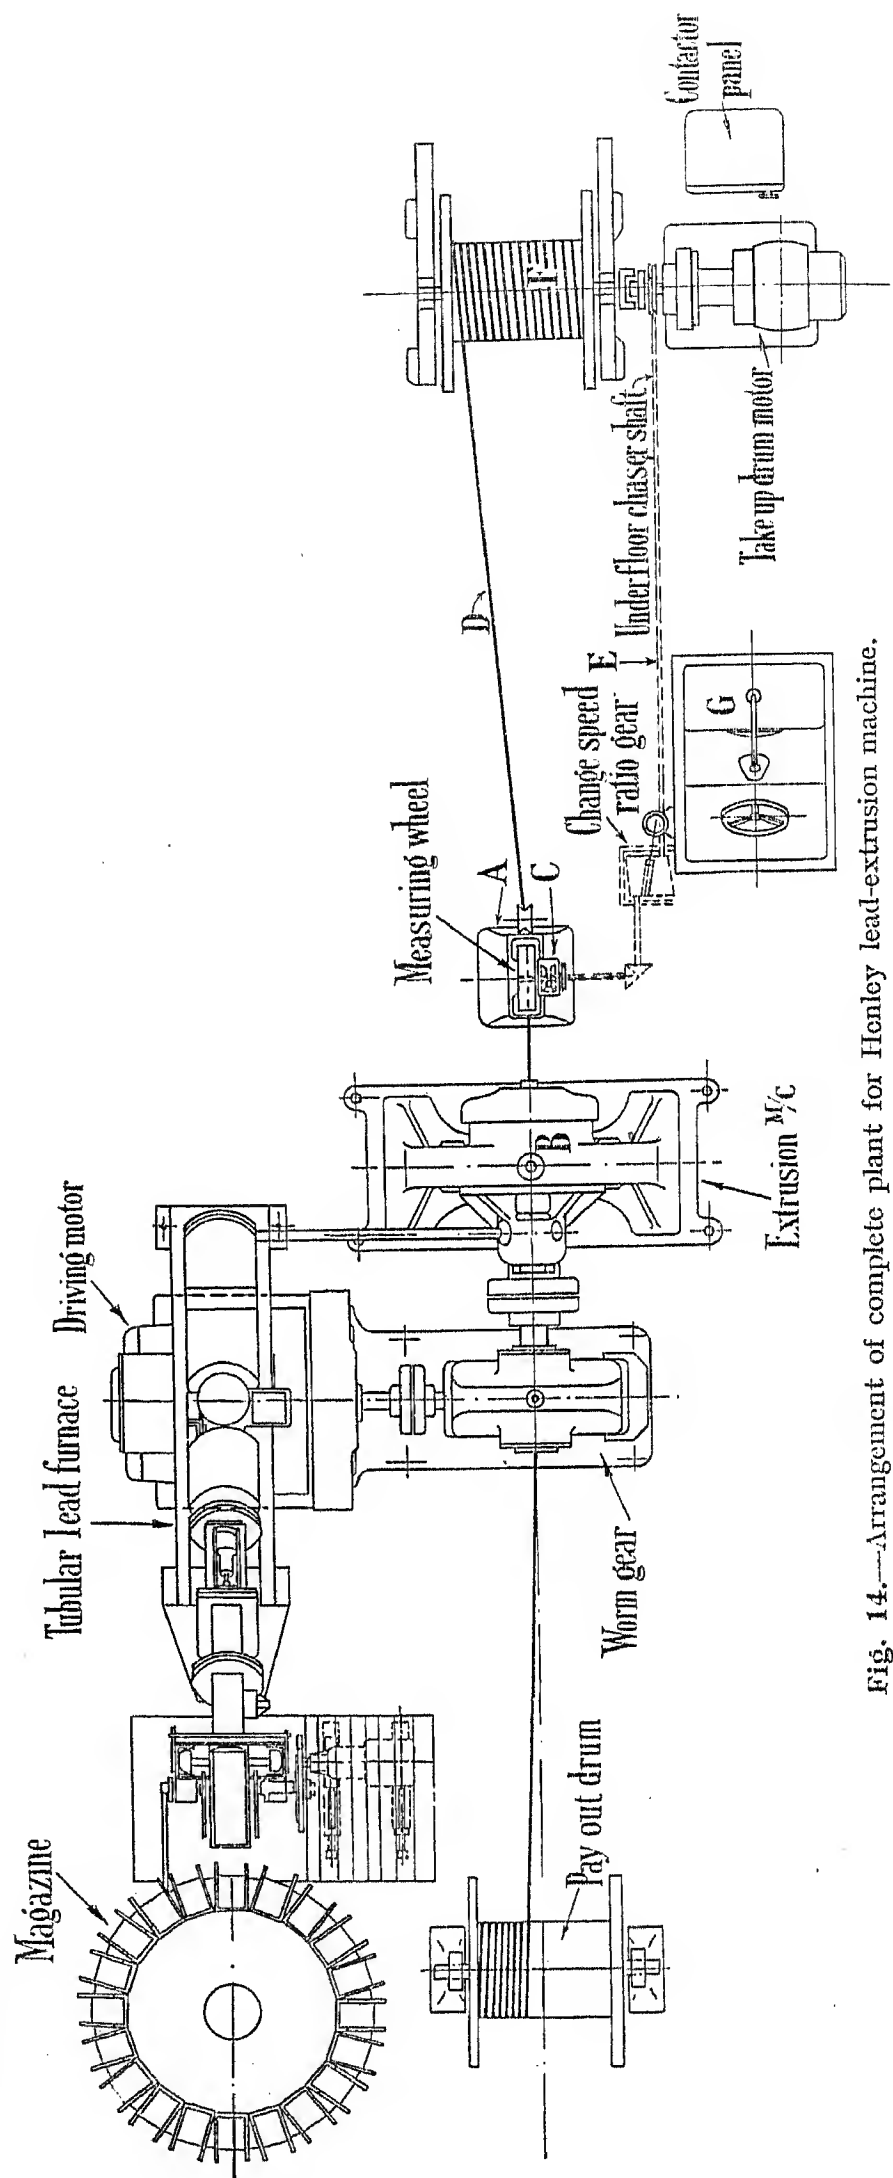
Arrangement of complete plant for Henley lead-extrusion machine.
